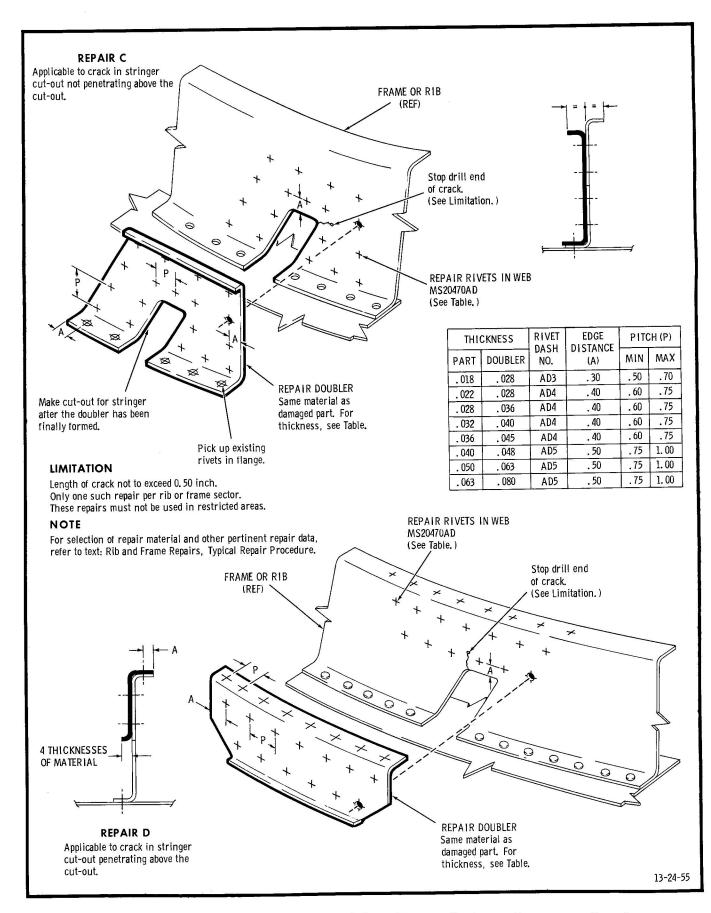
(Sheet 2 of 2) Cracks in Rib or Frame Stringer Cut-outs - Repair
